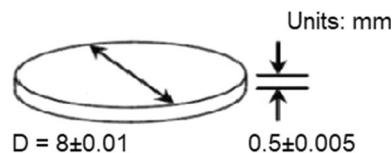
Dimensions and tolerances of the SP specimens
